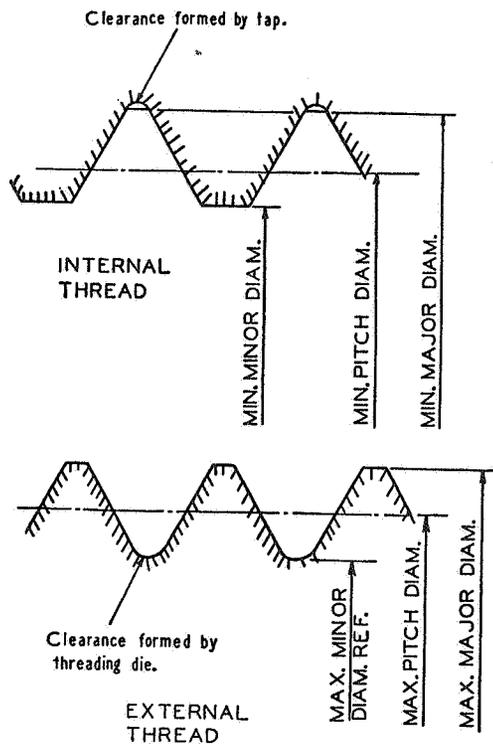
Thread dimensions to be determined for a special thread.
